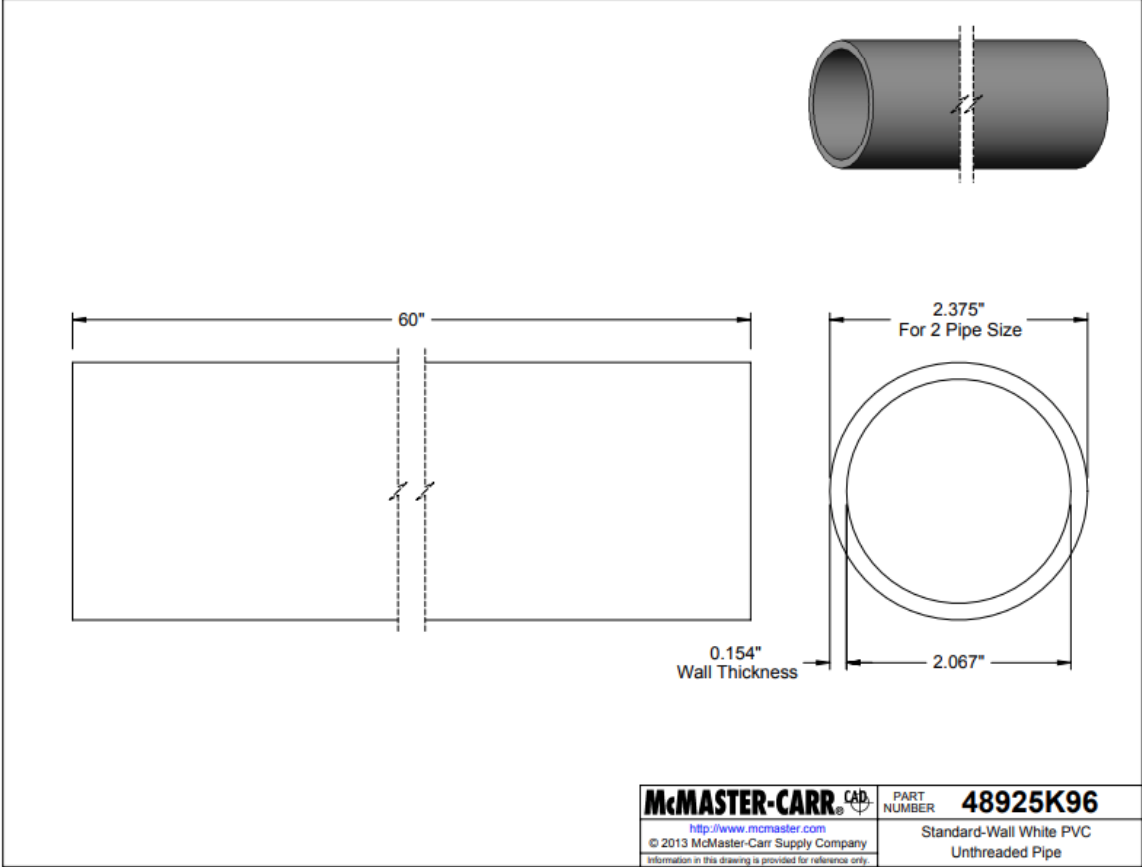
Two Inch PVC Pipe Engineering Drawing [28]
